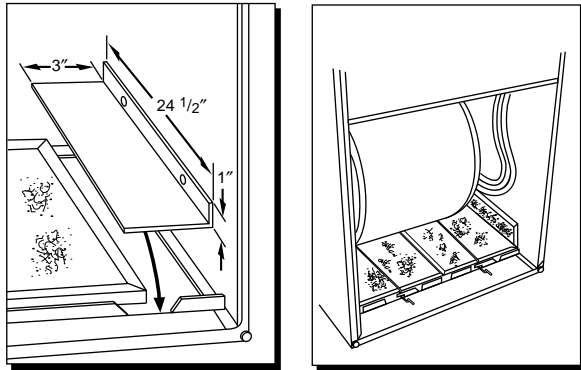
Bottom Filter Arrangement (Control Removed for Clarity)
